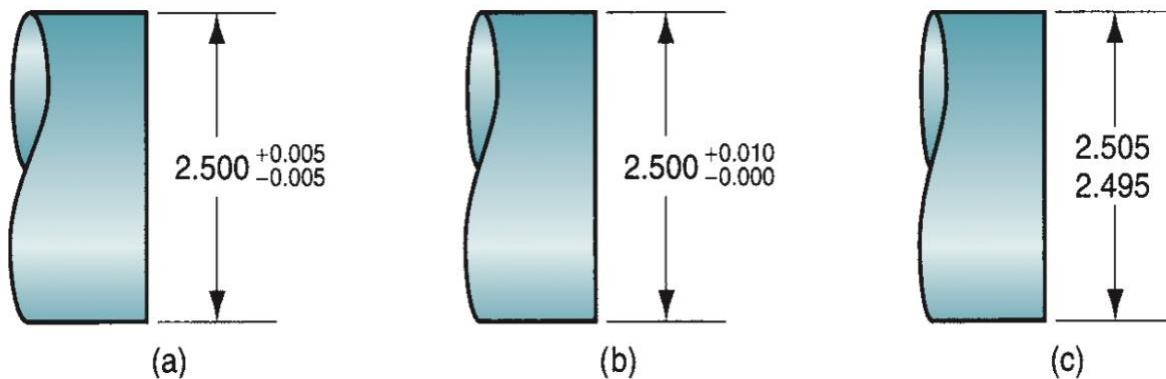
Three ways to specify tolerance limits for a nominal dimension of 2.500: (a) bi-lateral, (b) unilateral, and (c) limit dimensions.
